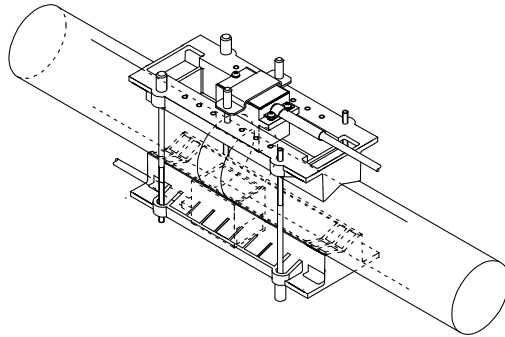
Checking the transducer mounting interval – A
